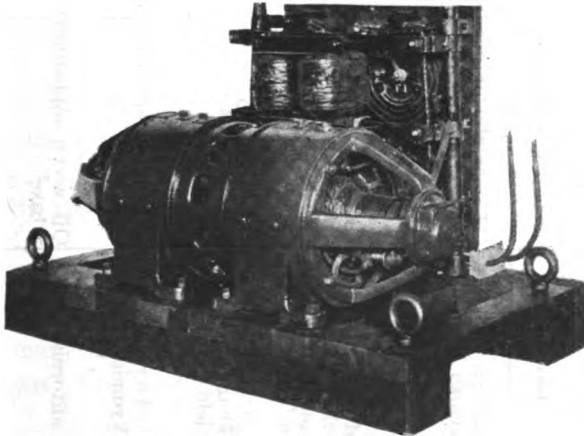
CONSTANT ENERGY ARC WELDING SET FOR METALLIC WELDING
